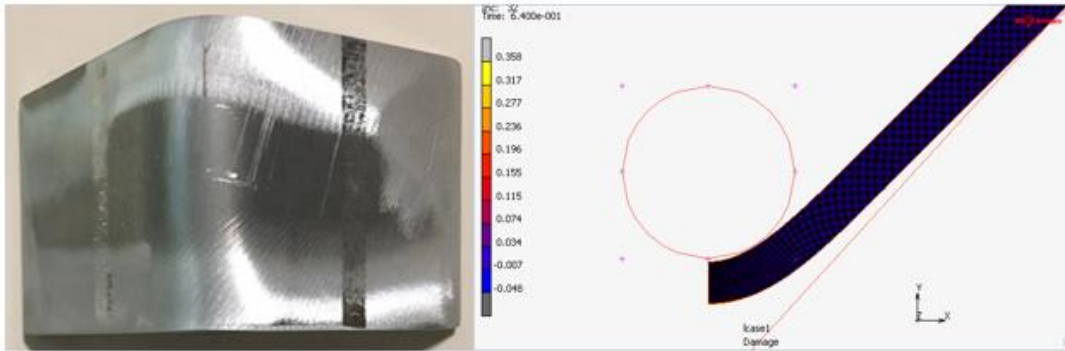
3mm Aluminium with R6mm –Test & Analysis
